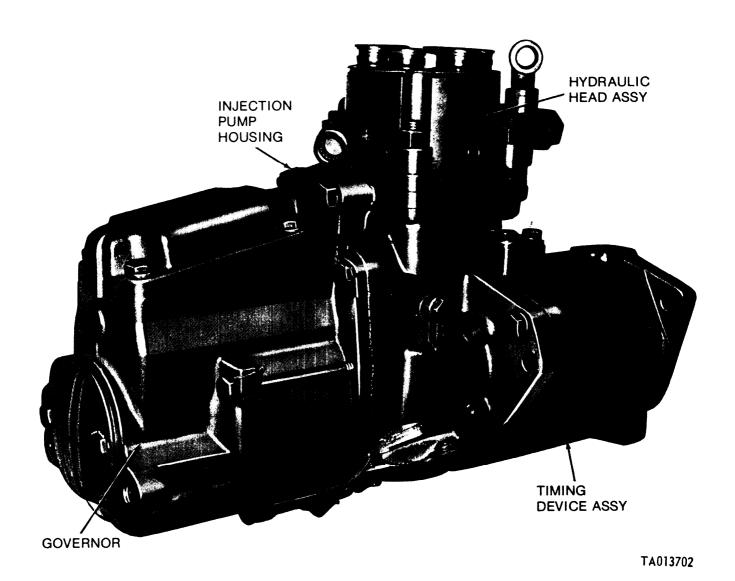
Metering and distributing fuel injection pump assembly (late code G), right rear view.
